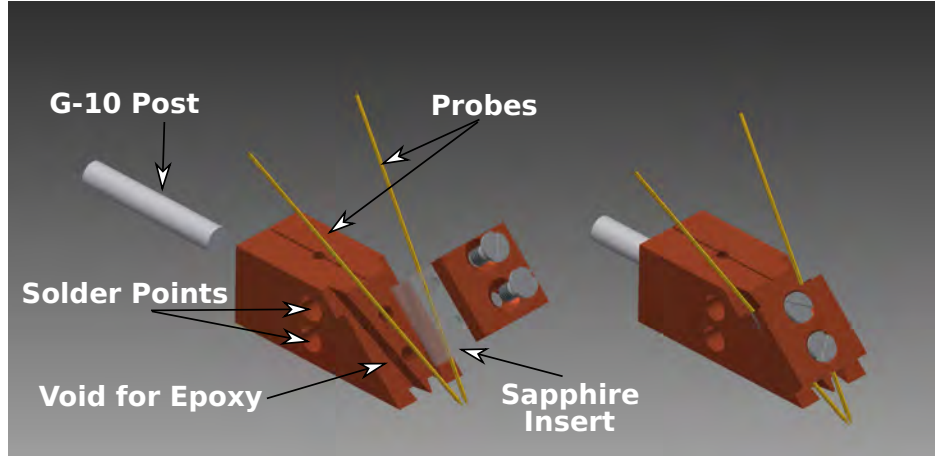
CAD view of the custom DC probe designed as part of this work. The 2 voids on the front face are filled with Stycast epoxy and the 2 gold plated tungsten probes sit in a machined slot in the epoxy and are held in place by a copper plate with a single crystal sapphire insert to prevent shorting. Copper braids are soldered directly to the probe body to provide cooling, and the probe is attached to the manipulator via a G-10 post to provide a thermal break.
